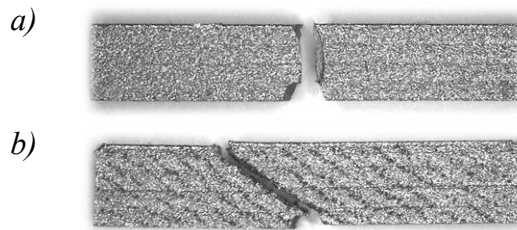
Visual appearance of fractured surfaces, SR & SR+LSP.
